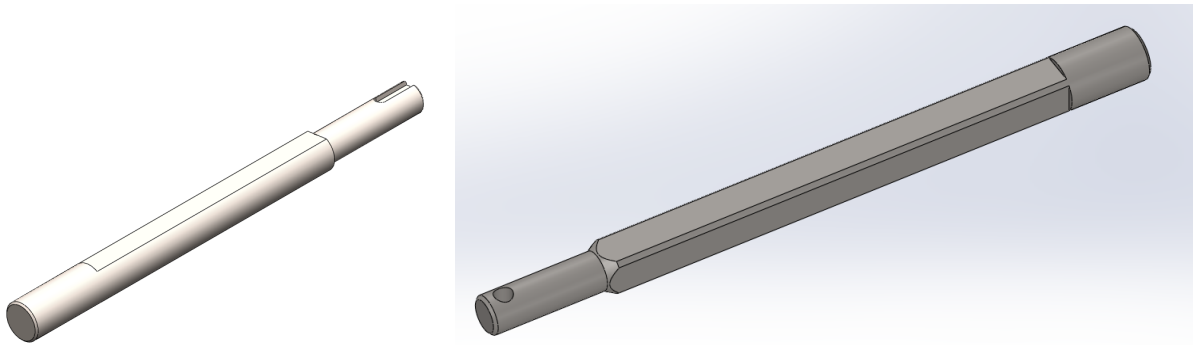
FIGURE: Design Prototype shaft with 2 flats, and Production Prototype shaft with 4 flats
